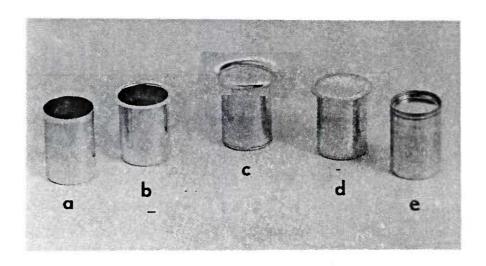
Welding and re-forming of cylindrical cup.
